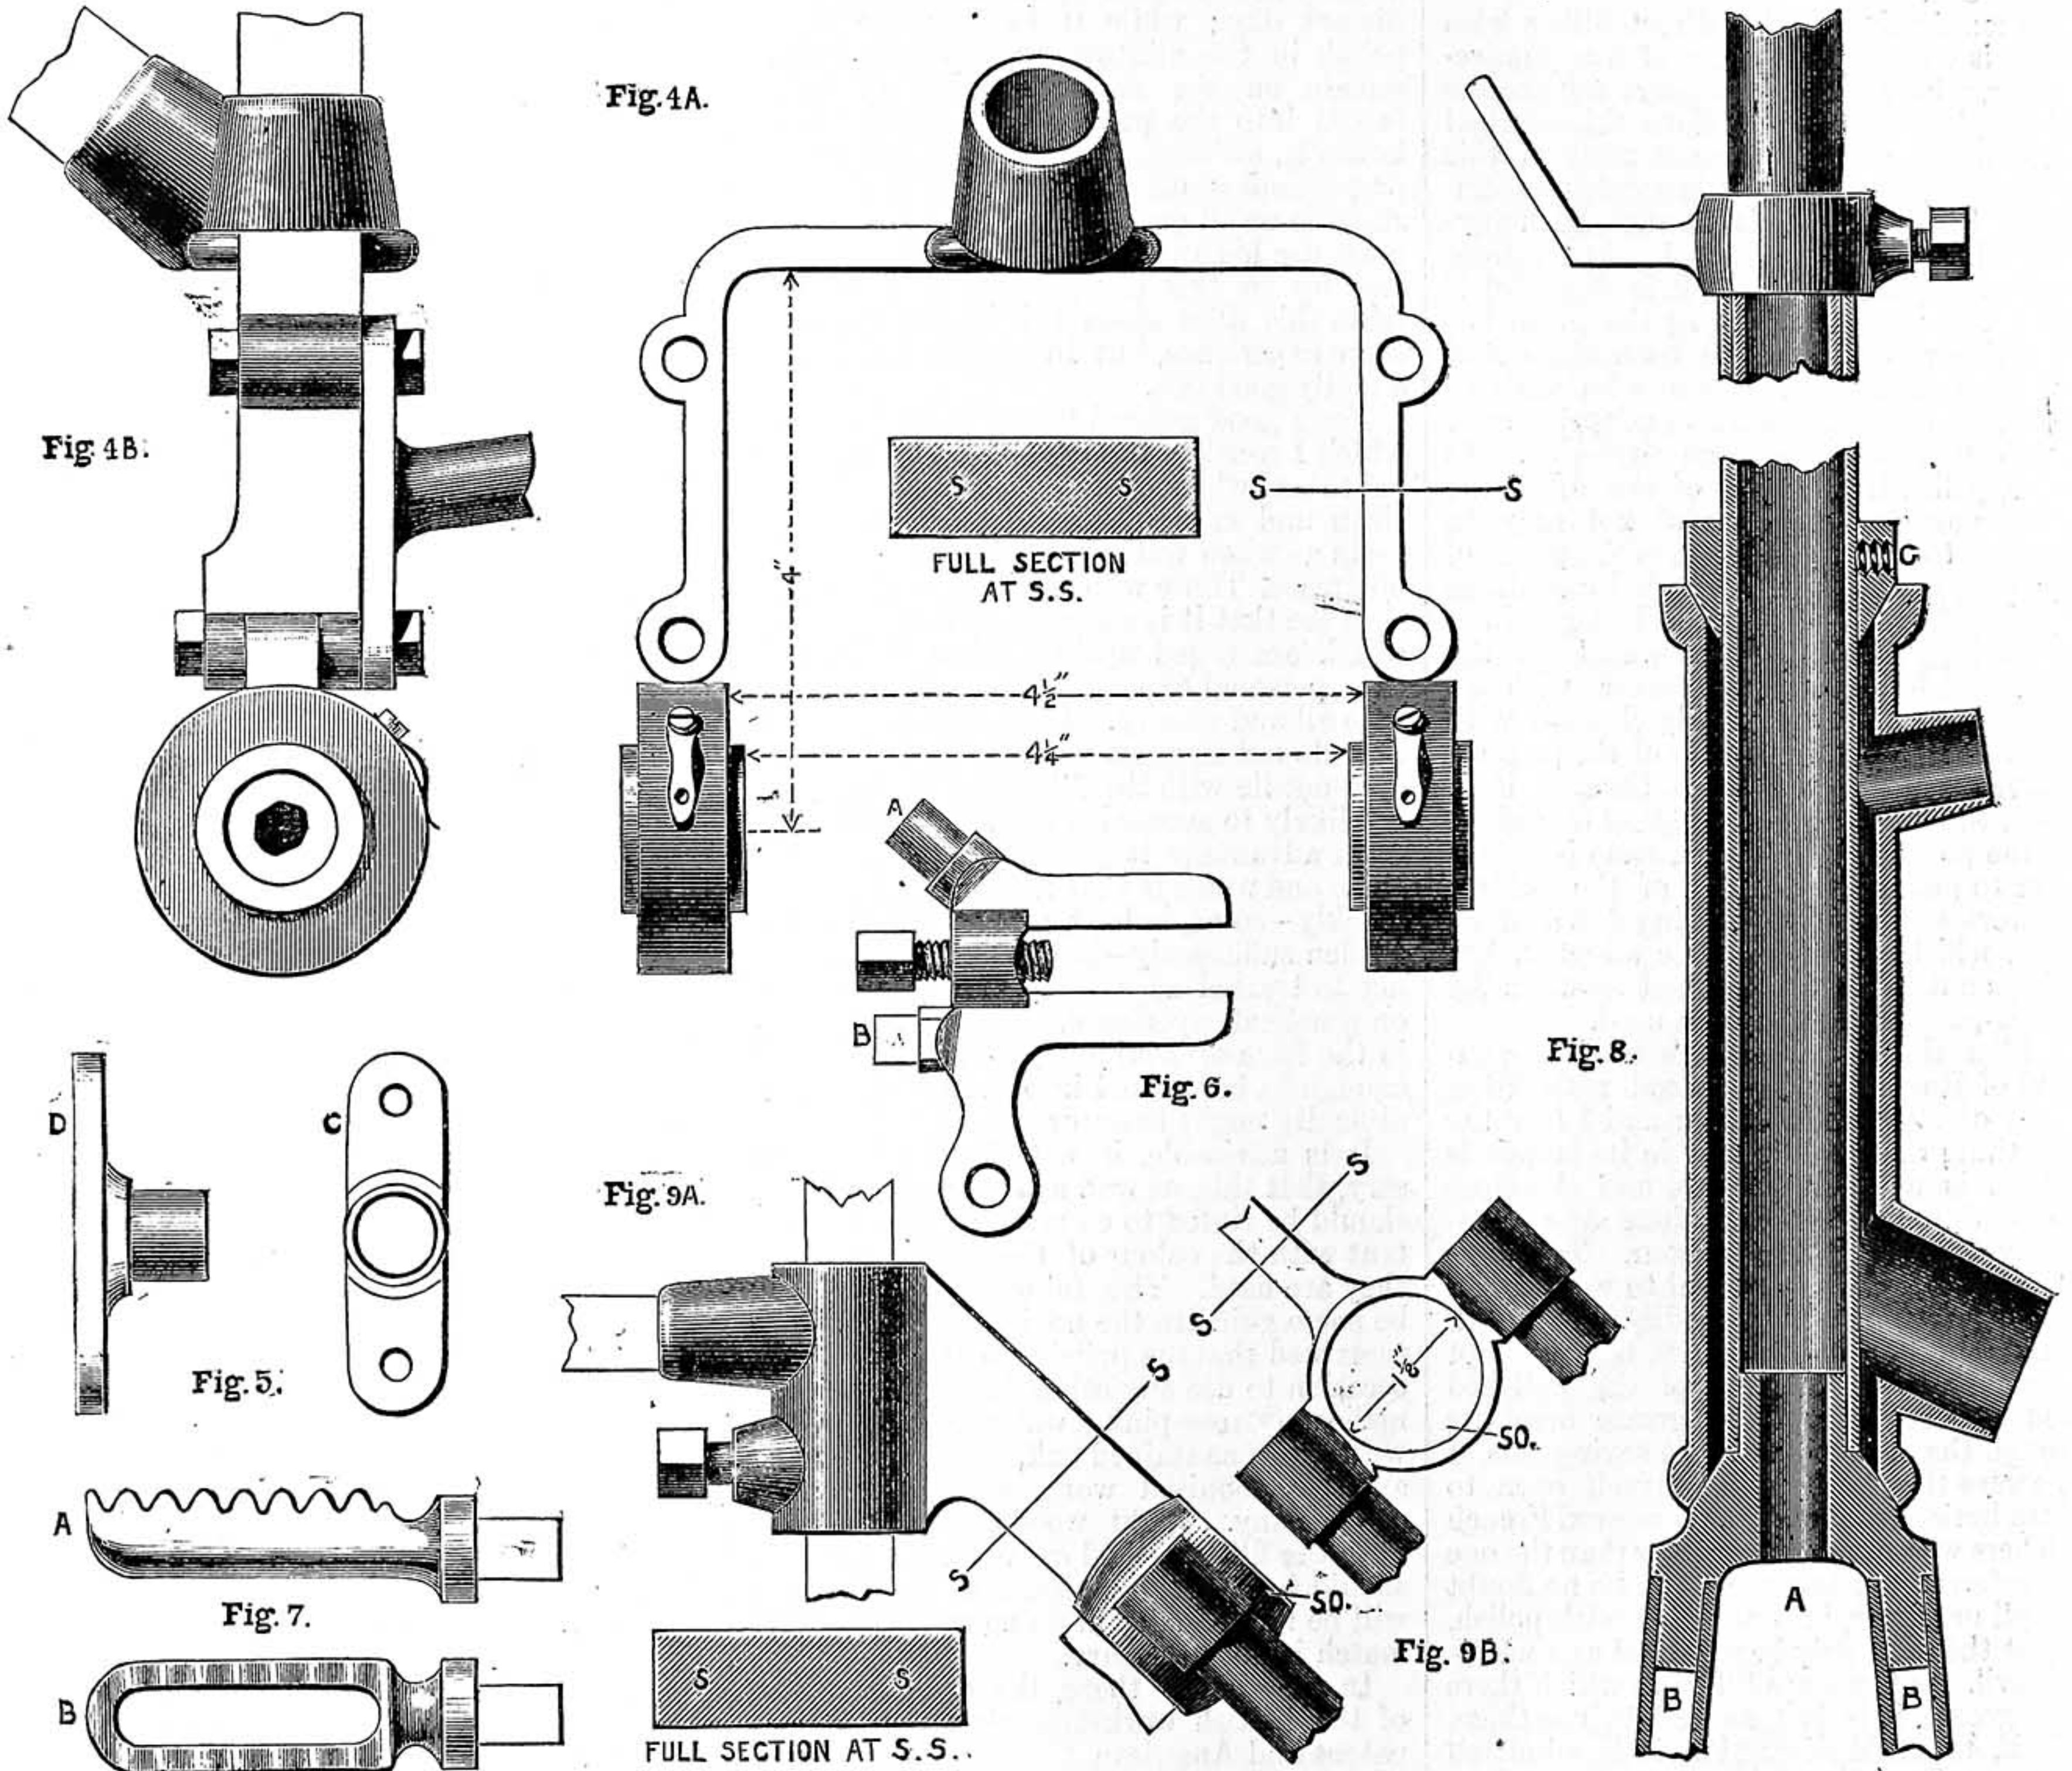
A.—Bottom Bracket Fork. Fig. 4 B.—Ditto, Side View. Fig. 5.—T-Piece showing Face (C) and Edge (D). Fig. 6.—Rear Fork Stamping. Fig. 7.—Mounting-Step, in Side View (A) and Plan (B). Fig. 8.—Section of Steering Head or Barrel. Fig. 9 A.—Connection of Upper Tubes of Frame (Side View). Fig. 9 B.—Ditto, Plan. The above figures are all half full size.
